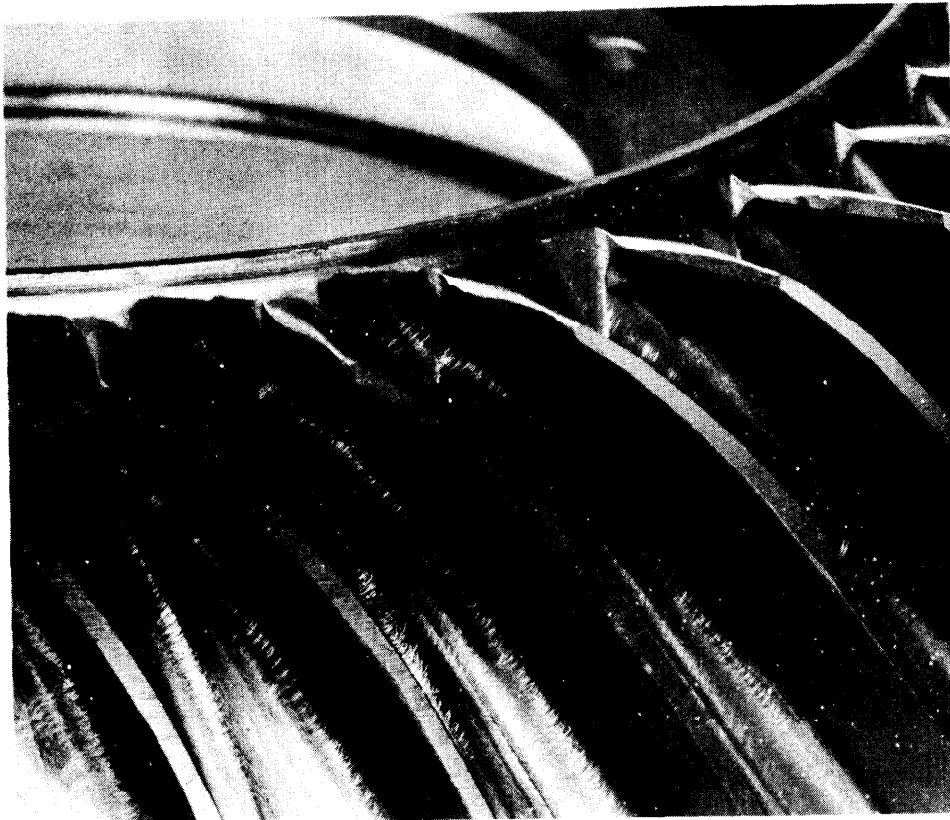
A T53 Impeller After Machining in a Gorton Mill
